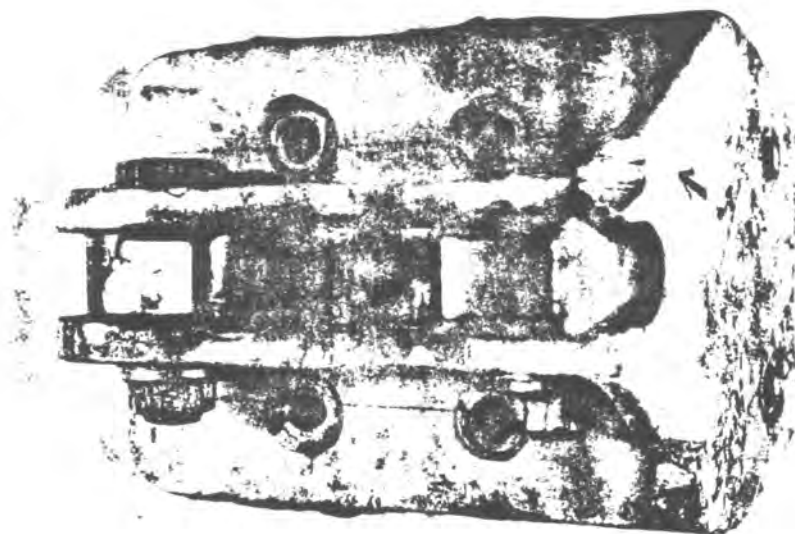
Saddle fitting as received. Arrows point to crack and damaged areas.
